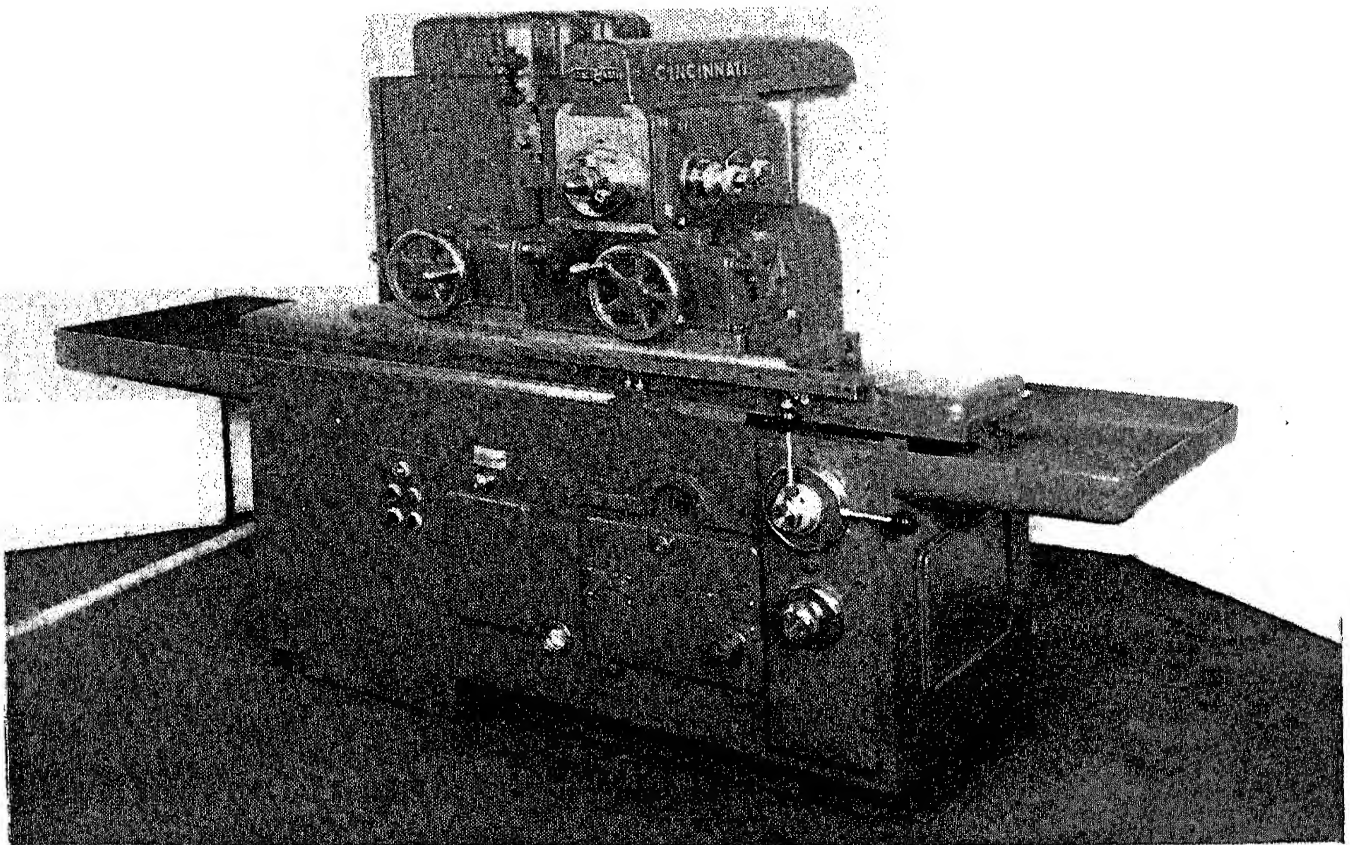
A 2-24 plain automatic milling machine. (Courtesy Cincinnati Milling Machine Co.)
